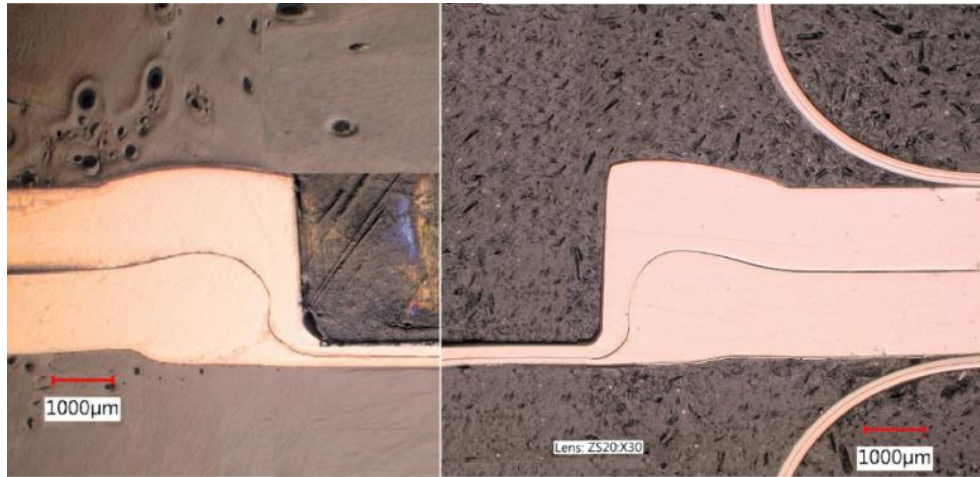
Optical images of mounted cross-sections through the clinched joint from fully-annealed sheets for forming force of 40 kN and blank holder type B with groove depths of 30% (left) and 75% (right) of sheet thickness.
